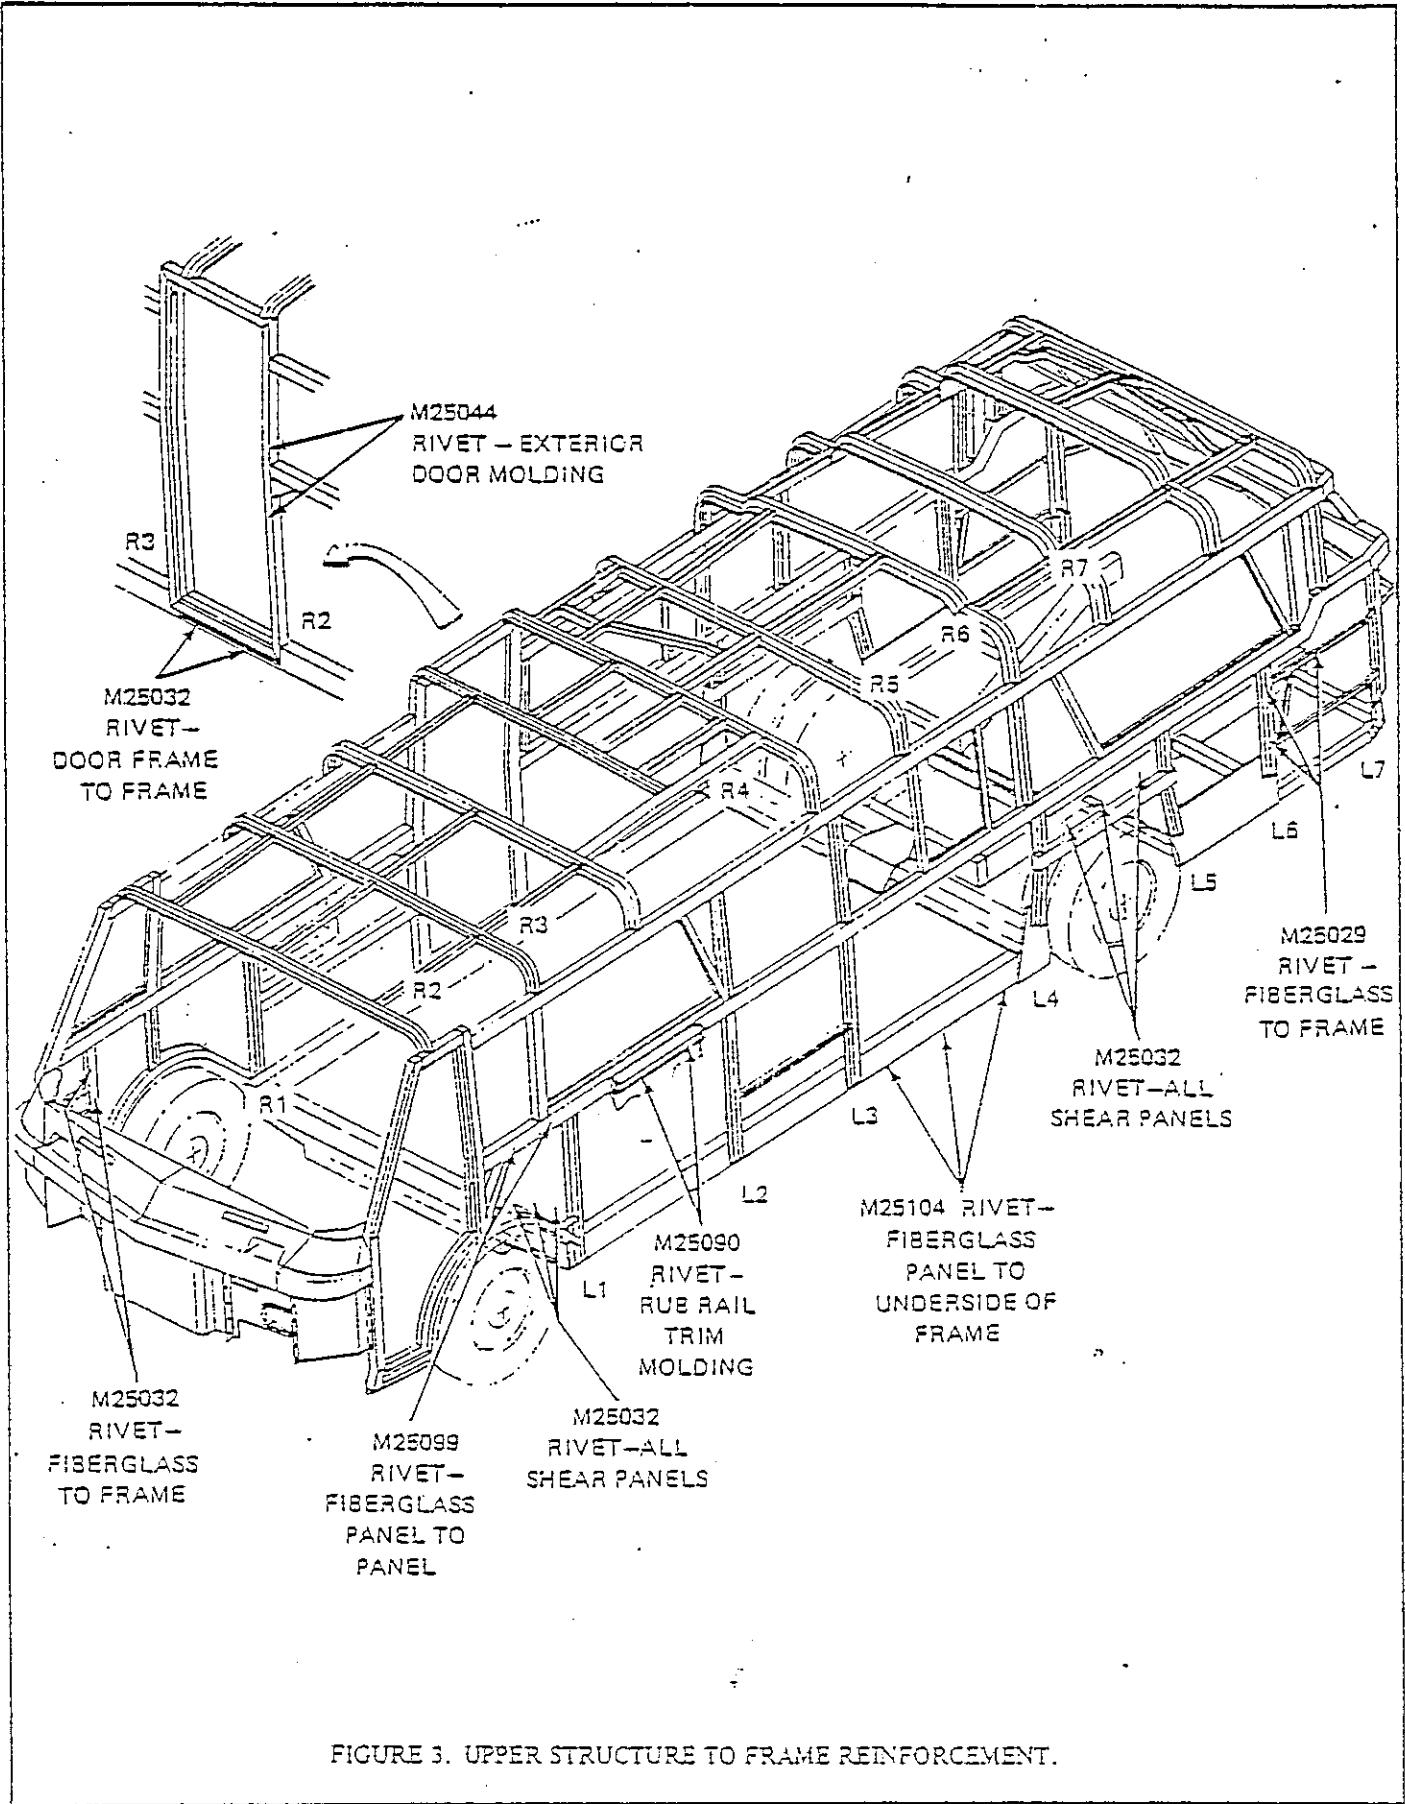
UPPER STRUCTURE TO FRAME REINFORCEMENT.
